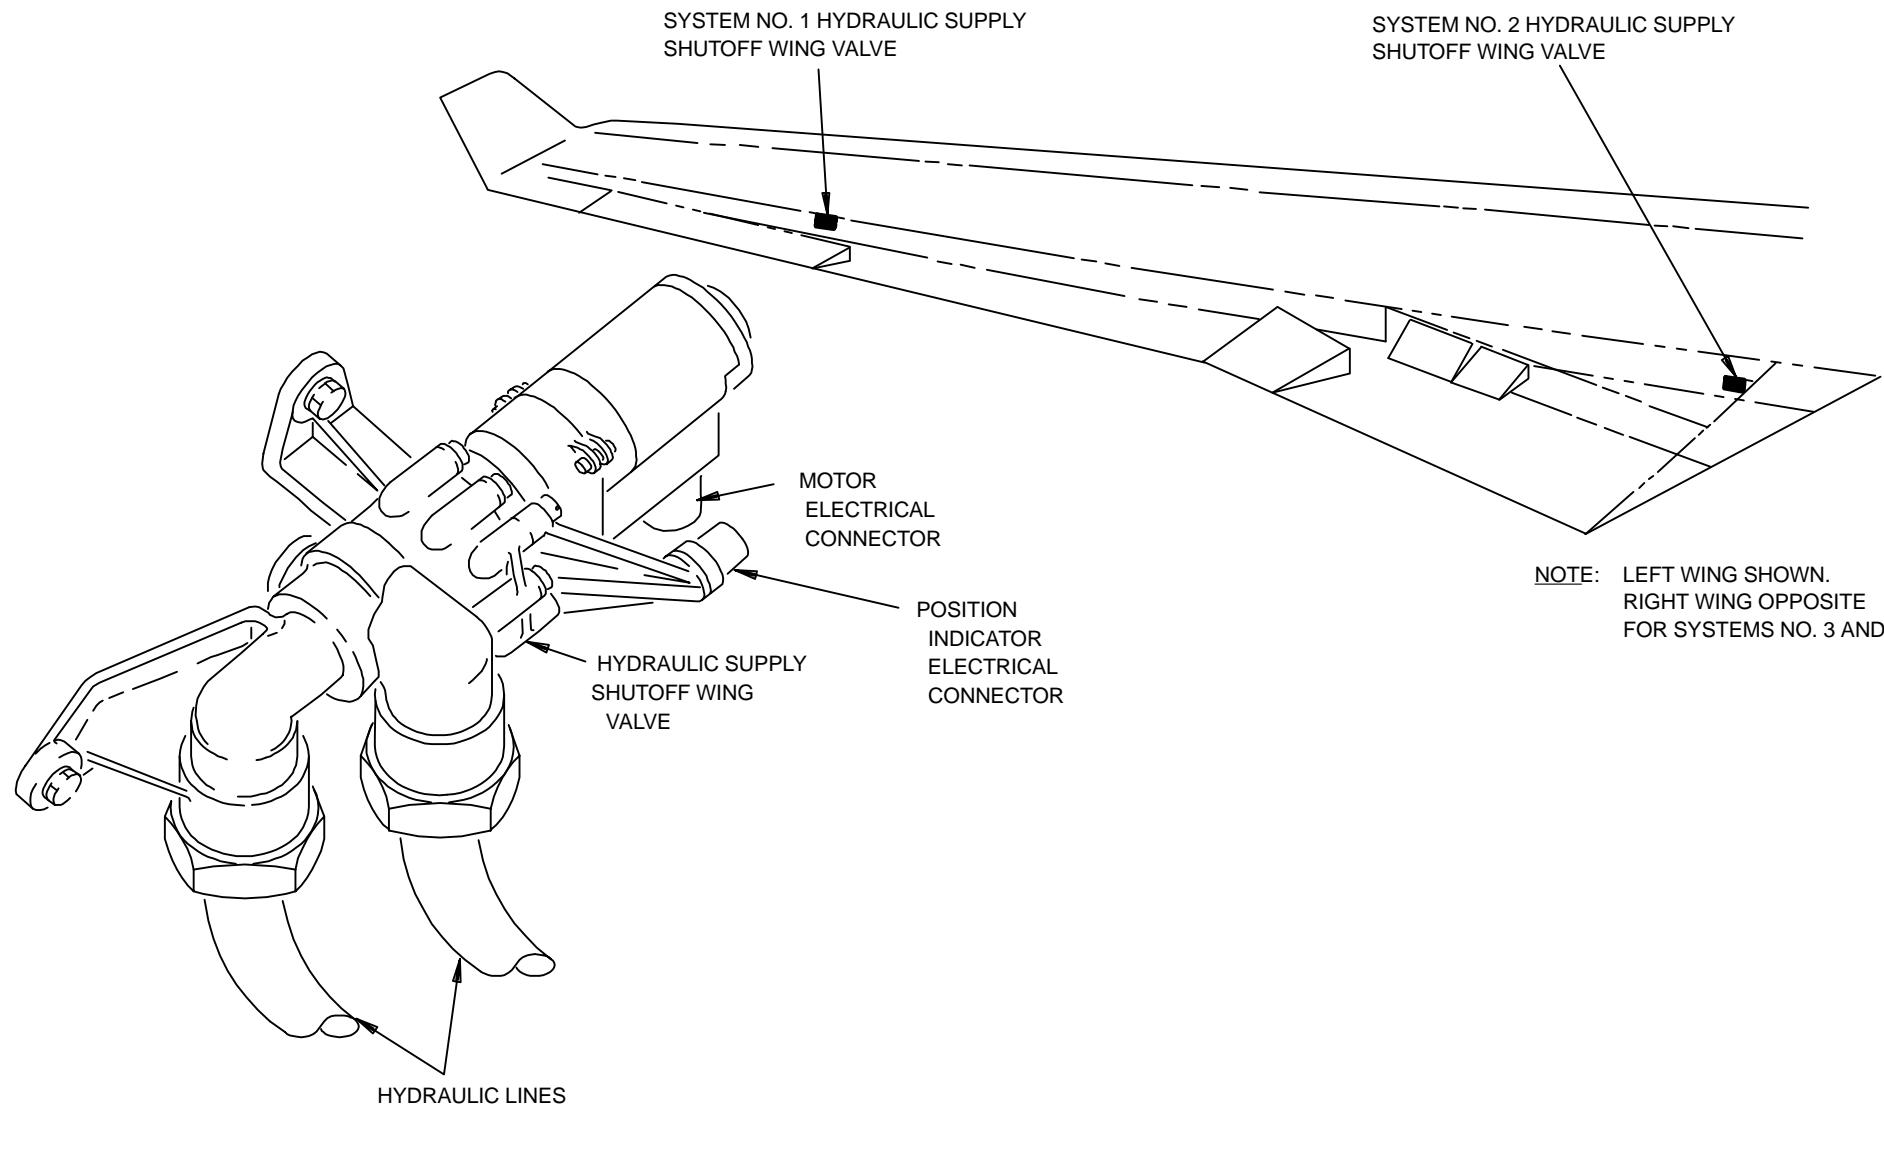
AILERON AND SPOILER HYDRAULIC POWER SHUTOFF VALVE LOCATION
